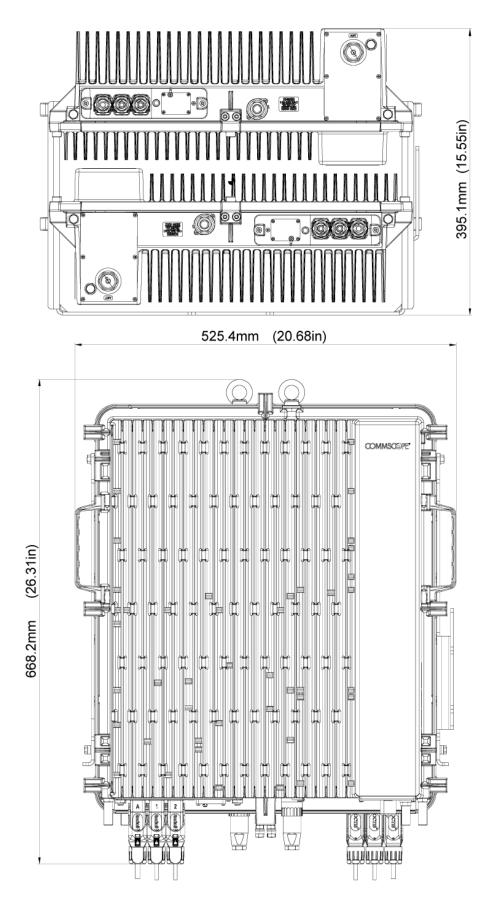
Mounting Dimensions for the Dual Mounting Bracket
